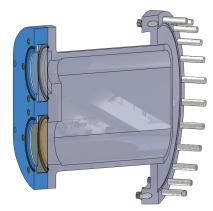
Common use of a *Clamping Flange* (D1003209-v2) for Primary Viewport Assembly in H1-L1
